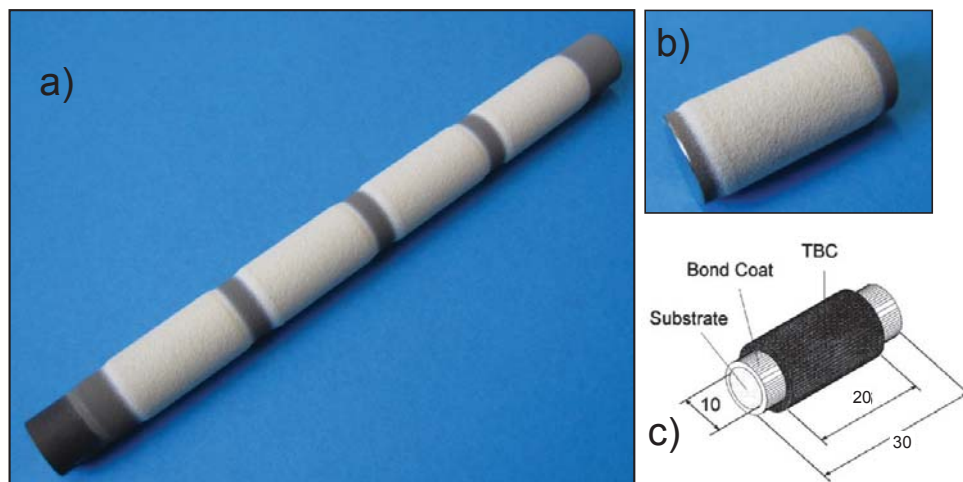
TBC systems in the as-delivered condition (a), after cutting into a single specimen (b) and schematic showing geometry and dimensions of TBC-specimen used for testing (c)
